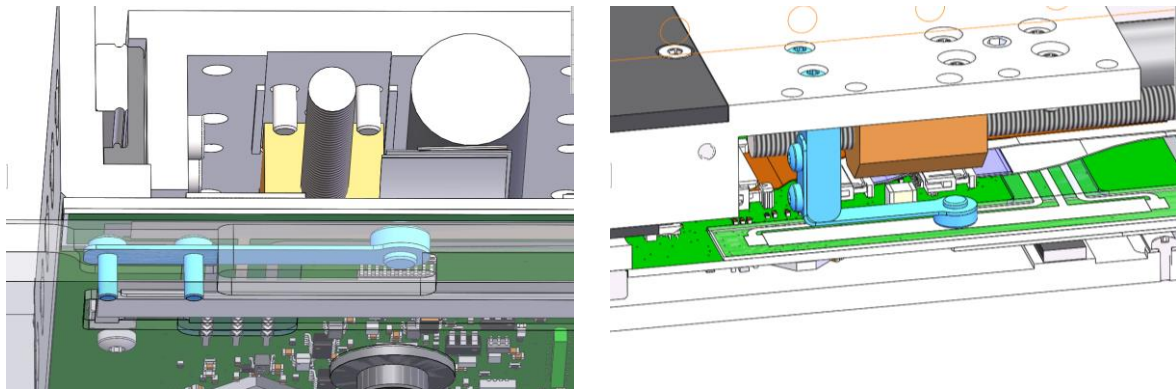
Initial leaf spring wiper design – A1 (left) and A2 (right)
